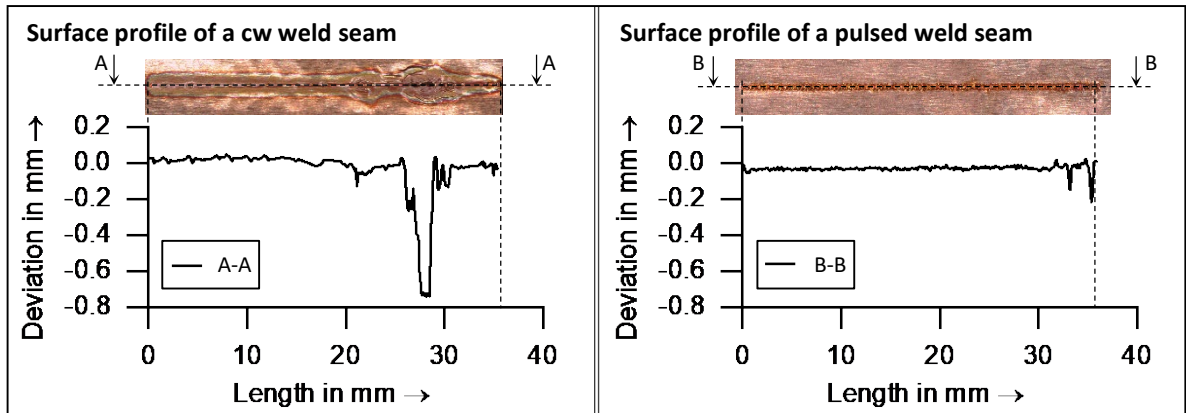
Deviation of the centrally measured weld seam height from the sample surface along the weld seam for the comparative weld seams
